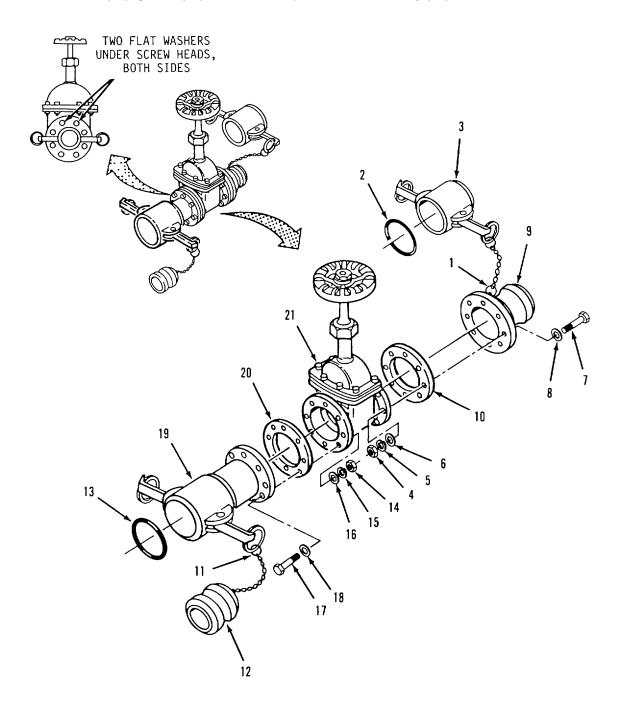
Gate Valve Assembly (4-Inch) Disassembly.
